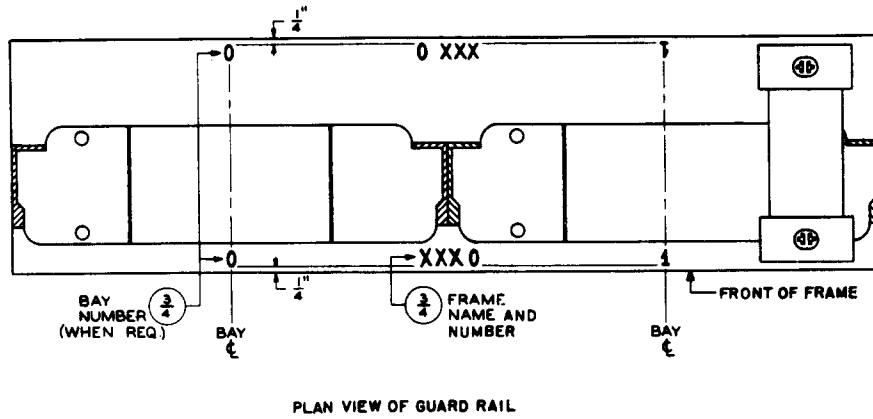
Numerical Bay Stamping for Double-bay Frames With Bulb-angle Uprights and Sheet Metal Base
